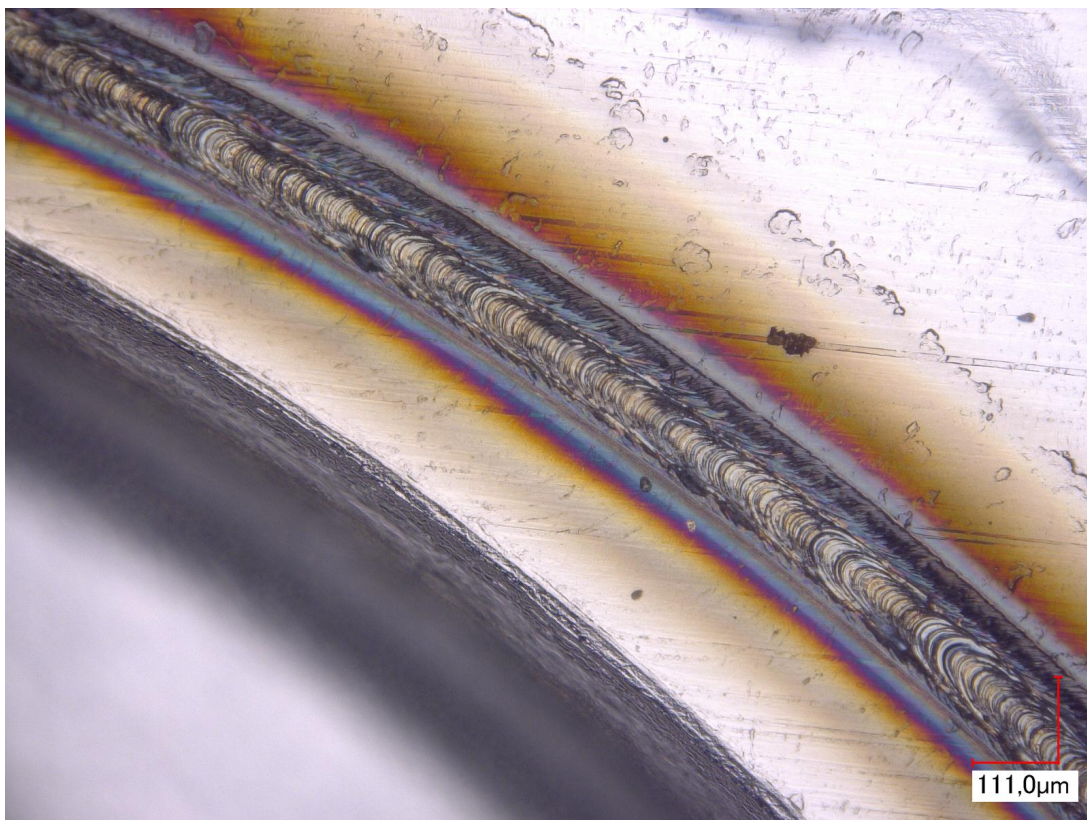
Weld seam without the usage of proper gas shielding
